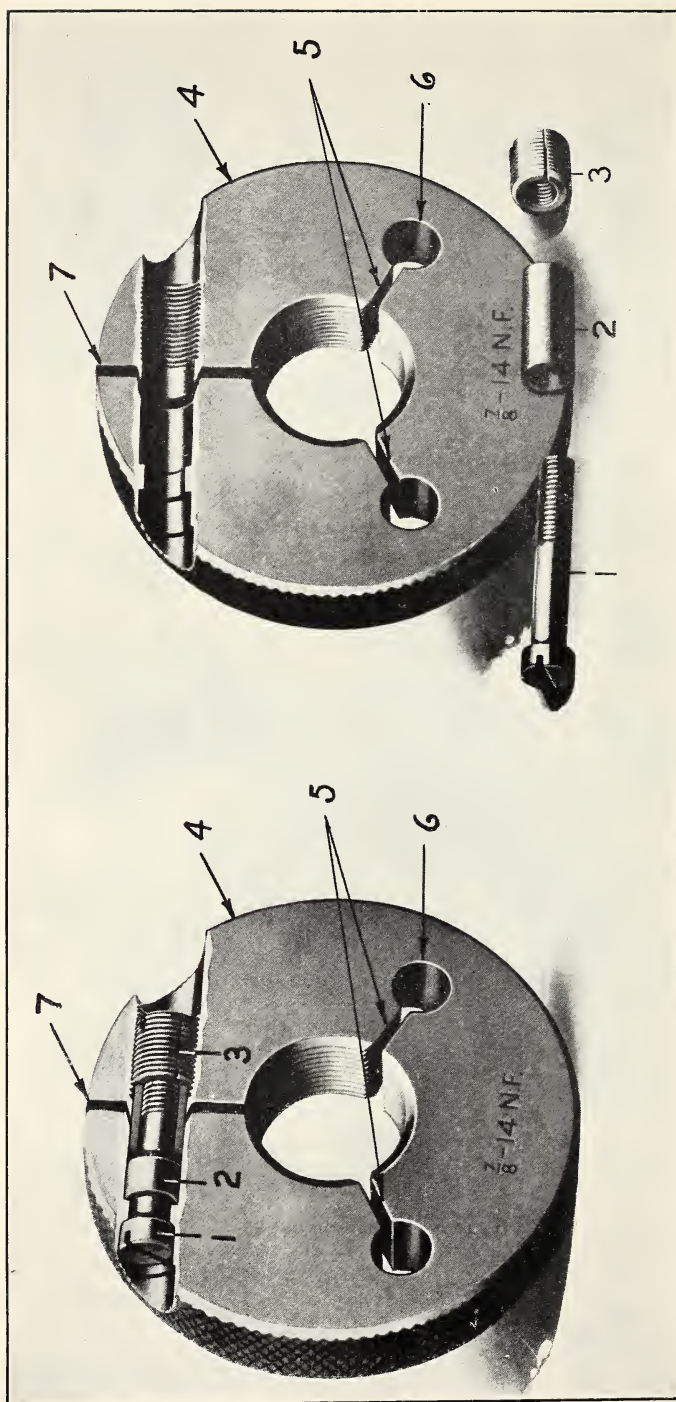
American Gage Design Standard thread ring gage locking device, details of construction, range no. 0 to $5\frac{1}{2}$ inches, inclusive.
